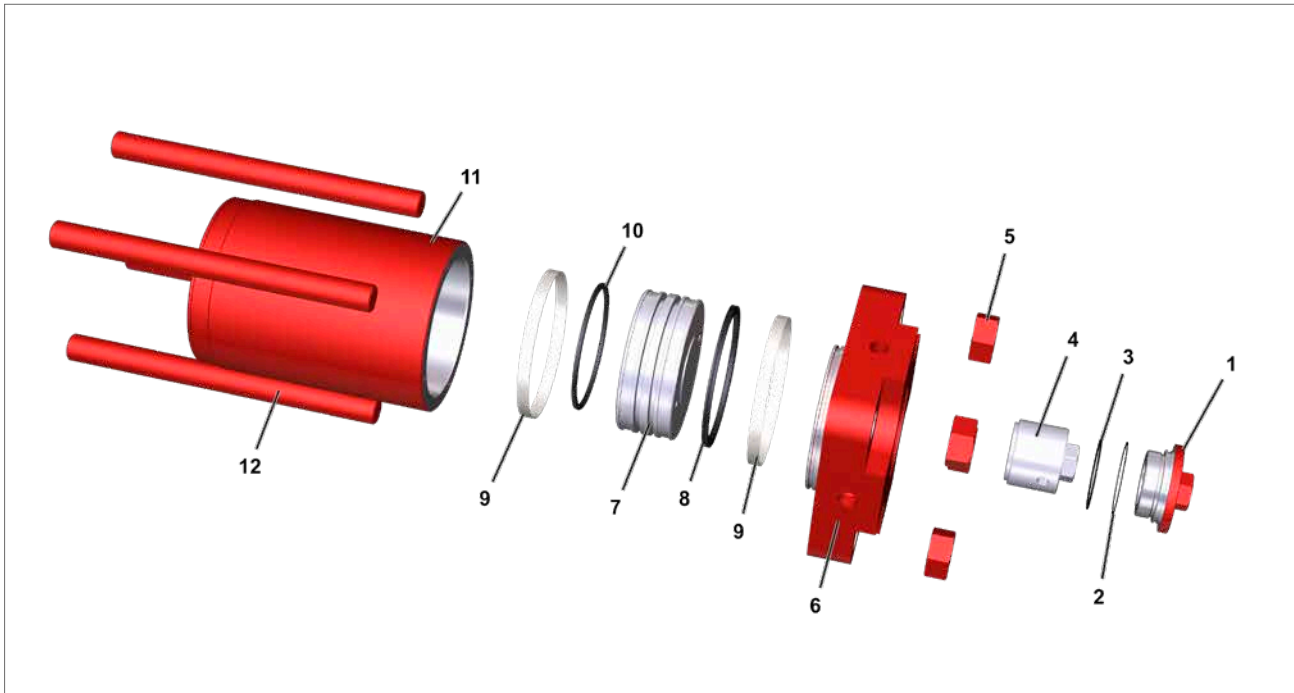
Hydraulic cylinder RH/D4 double-acting (4 cylinders) actuator
